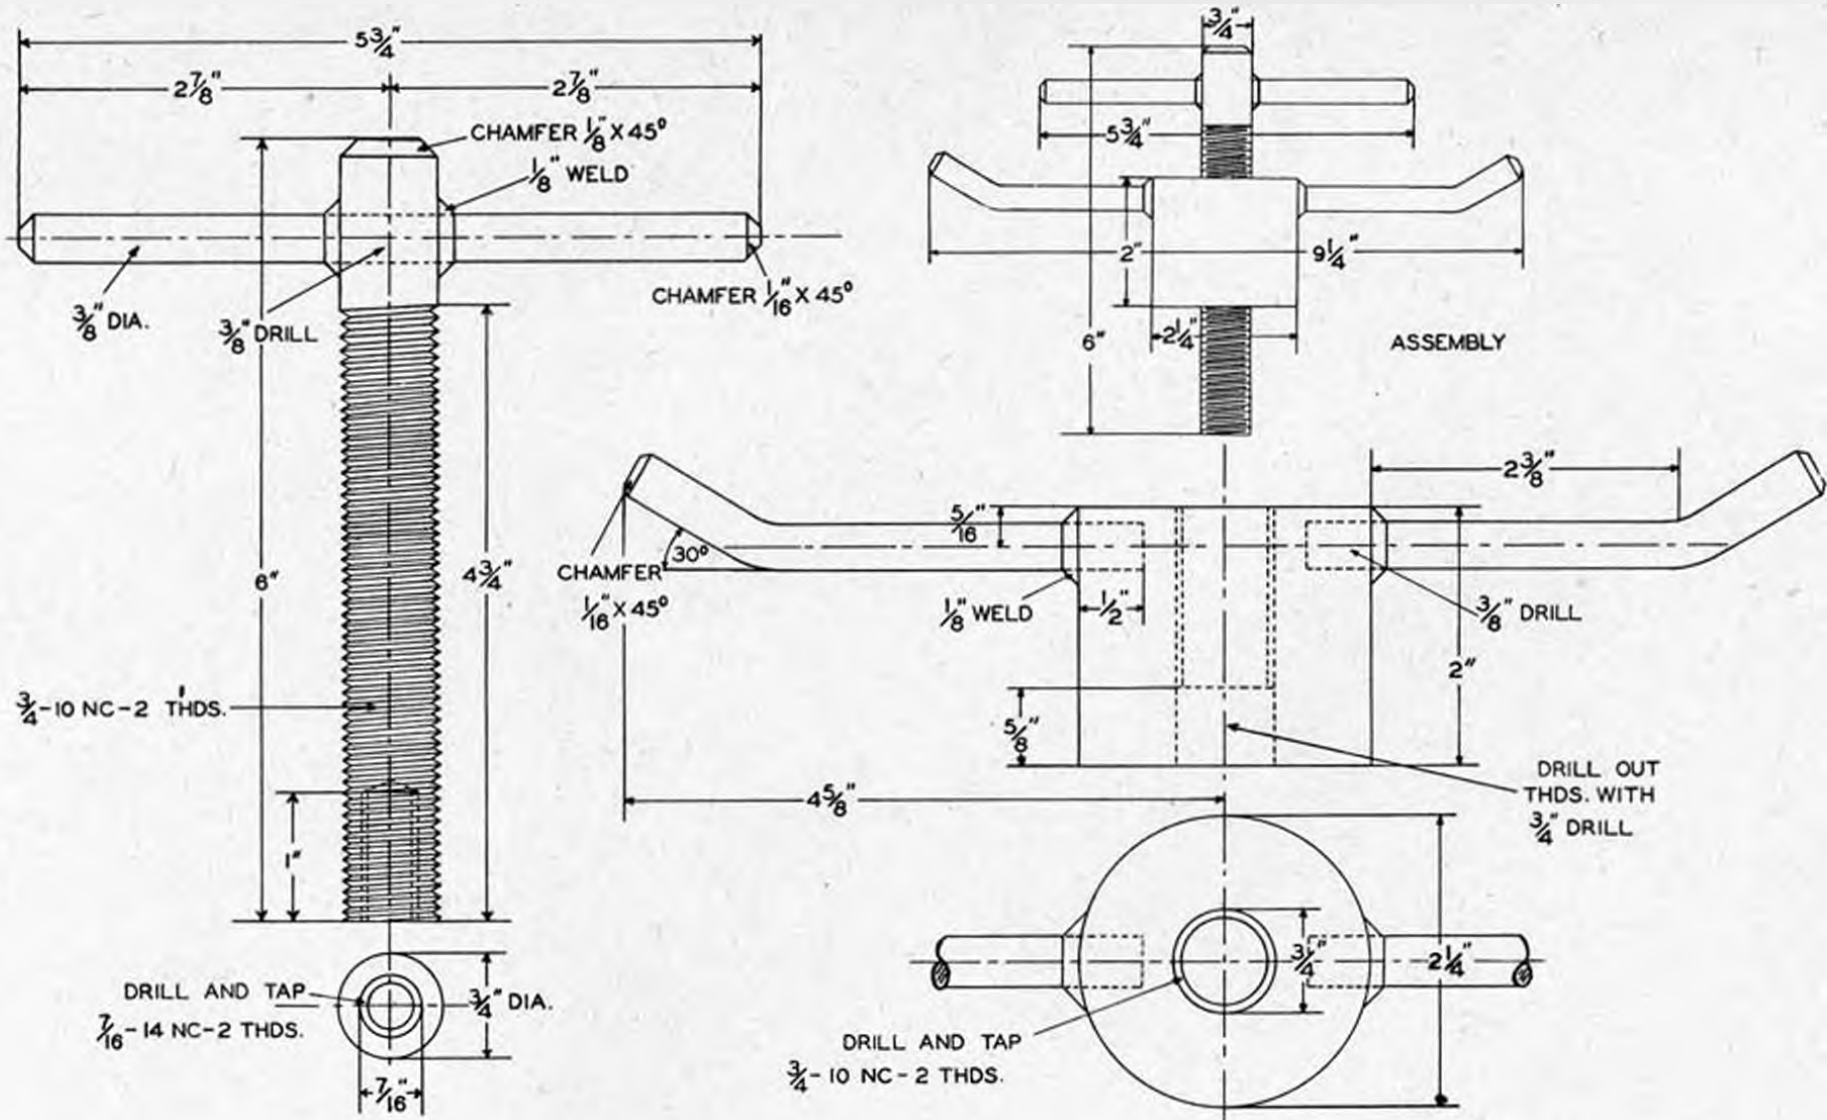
Mine Mk 25-2, Extender Retracting Tool
